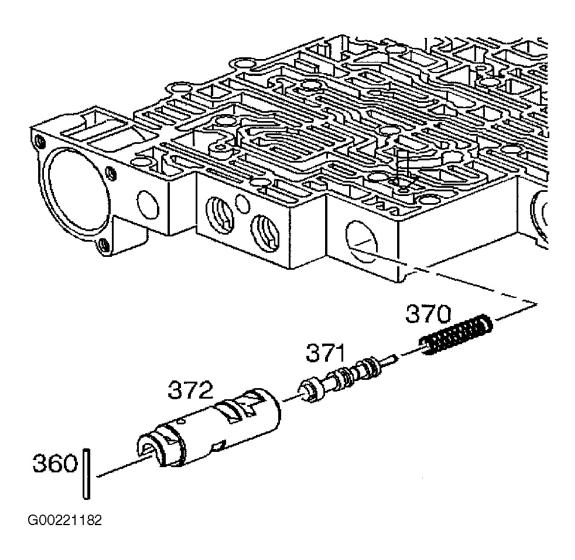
Removing/Installing 1-2 Accumulator Assembly Courtesy of GENERAL MOTORS CORP.
